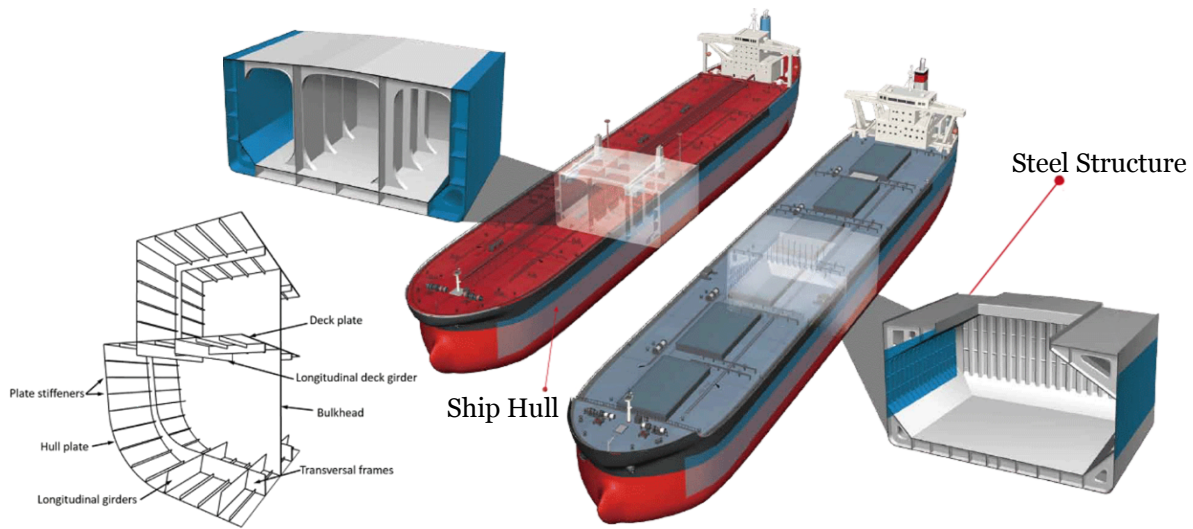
Ship structural steel layout (hull, deck, and bulkheads)
